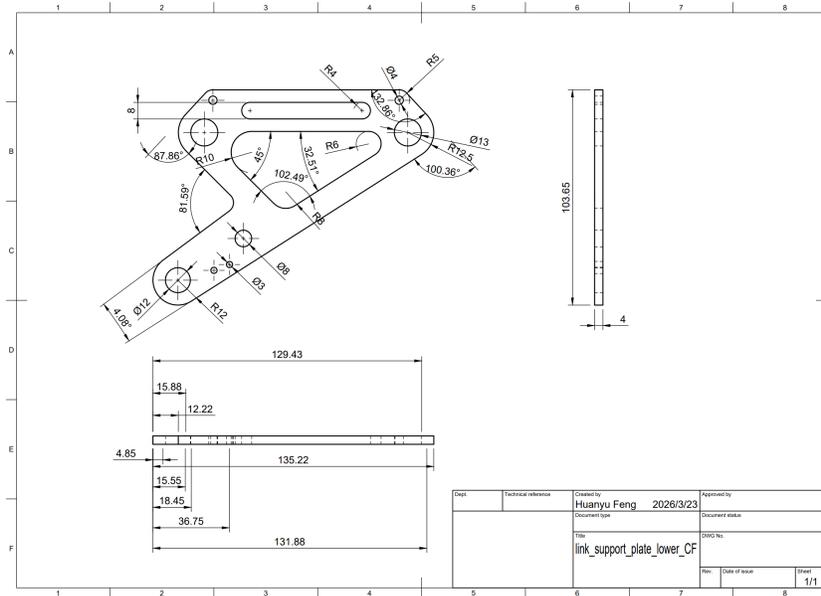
Engineering drawing of the lower carbon-fiber link support plate
